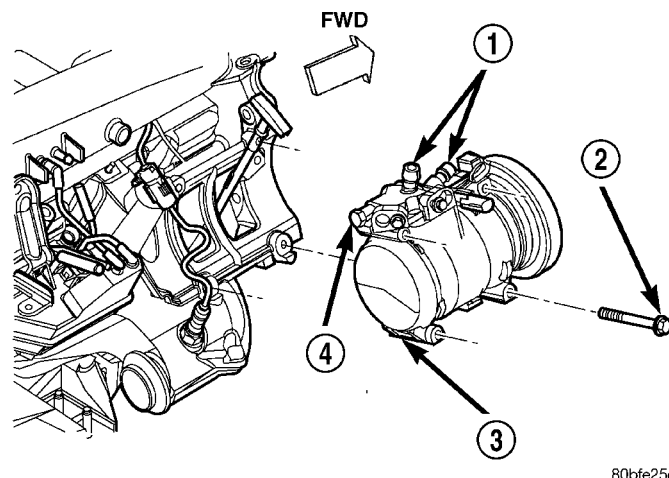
COMPRESSOR MOUNTING - 3.2L/3.5L
